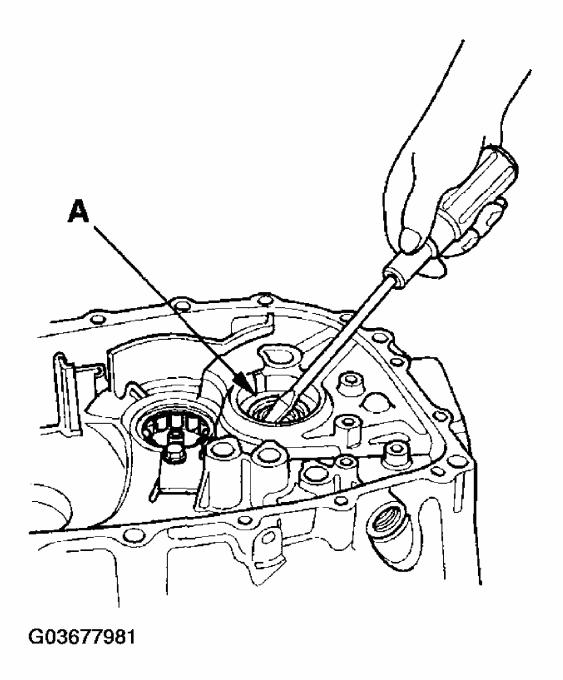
Removing Oil Seal From Clutch Side Courtesy of AMERICAN HONDA MOTOR CO., INC.
